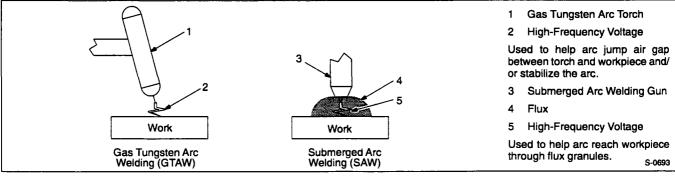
Welding Processes Requiring High Frequency
